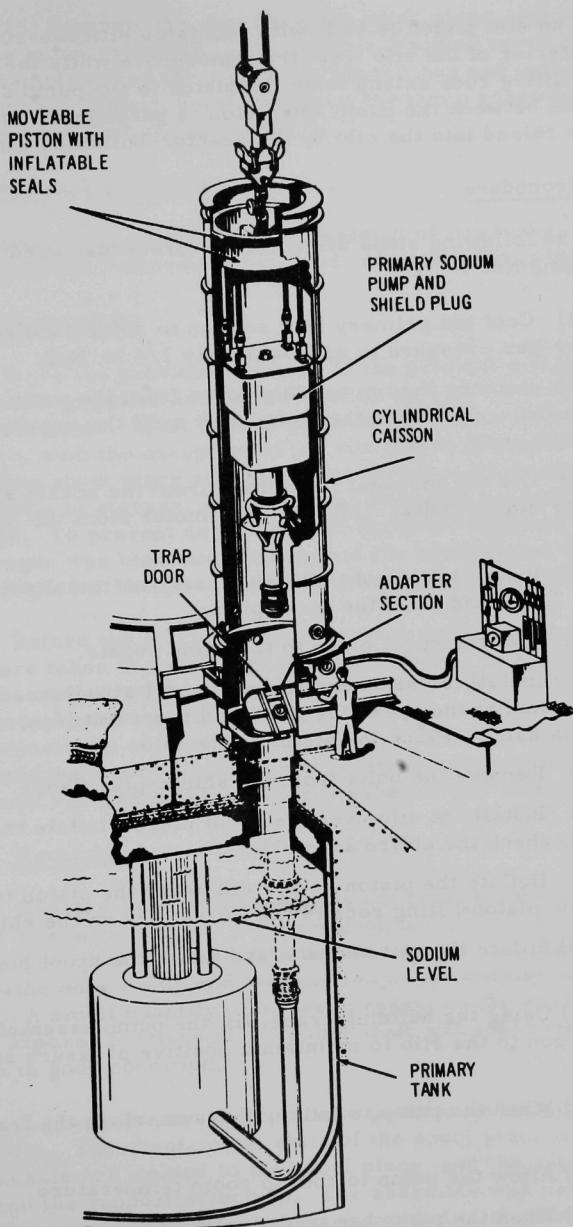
Pump-removal Assembly. ANL Neg. No. 103-N5101.
